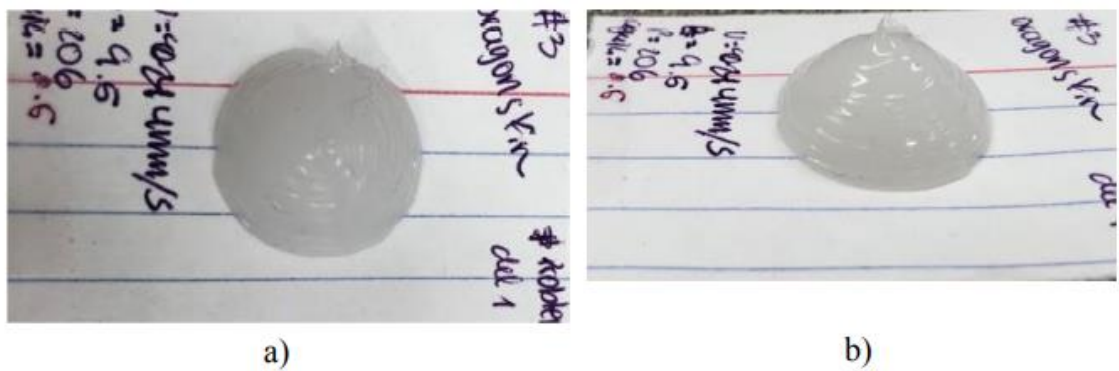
Circular pyramid using a 20G needle with a printing time of 15 minutes and a printing speed of 4 mm/s a) Top view b) Side view
